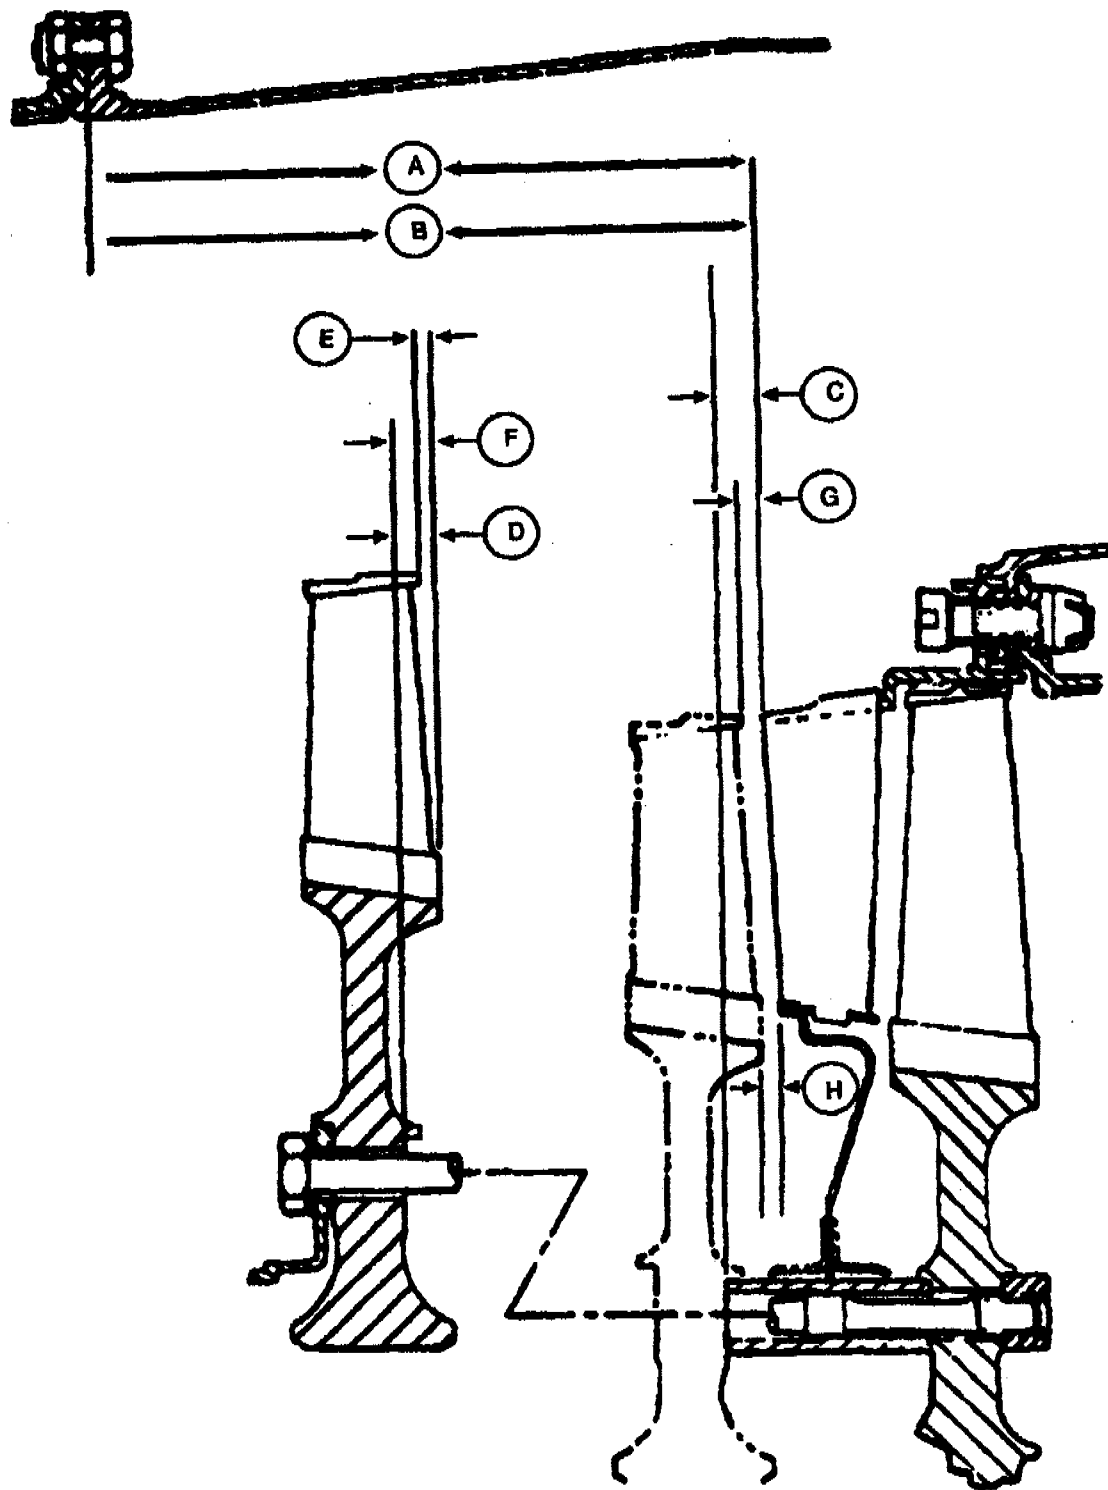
Determining Clearance Between First Stage Power Turbine Rotor and Second Stage Power Turbine Nozzle.
